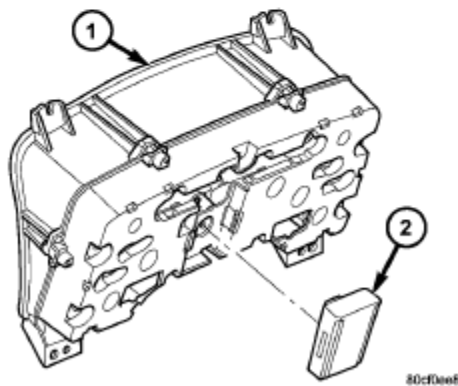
REMOTE KEYLESS ENTRY MODULE
